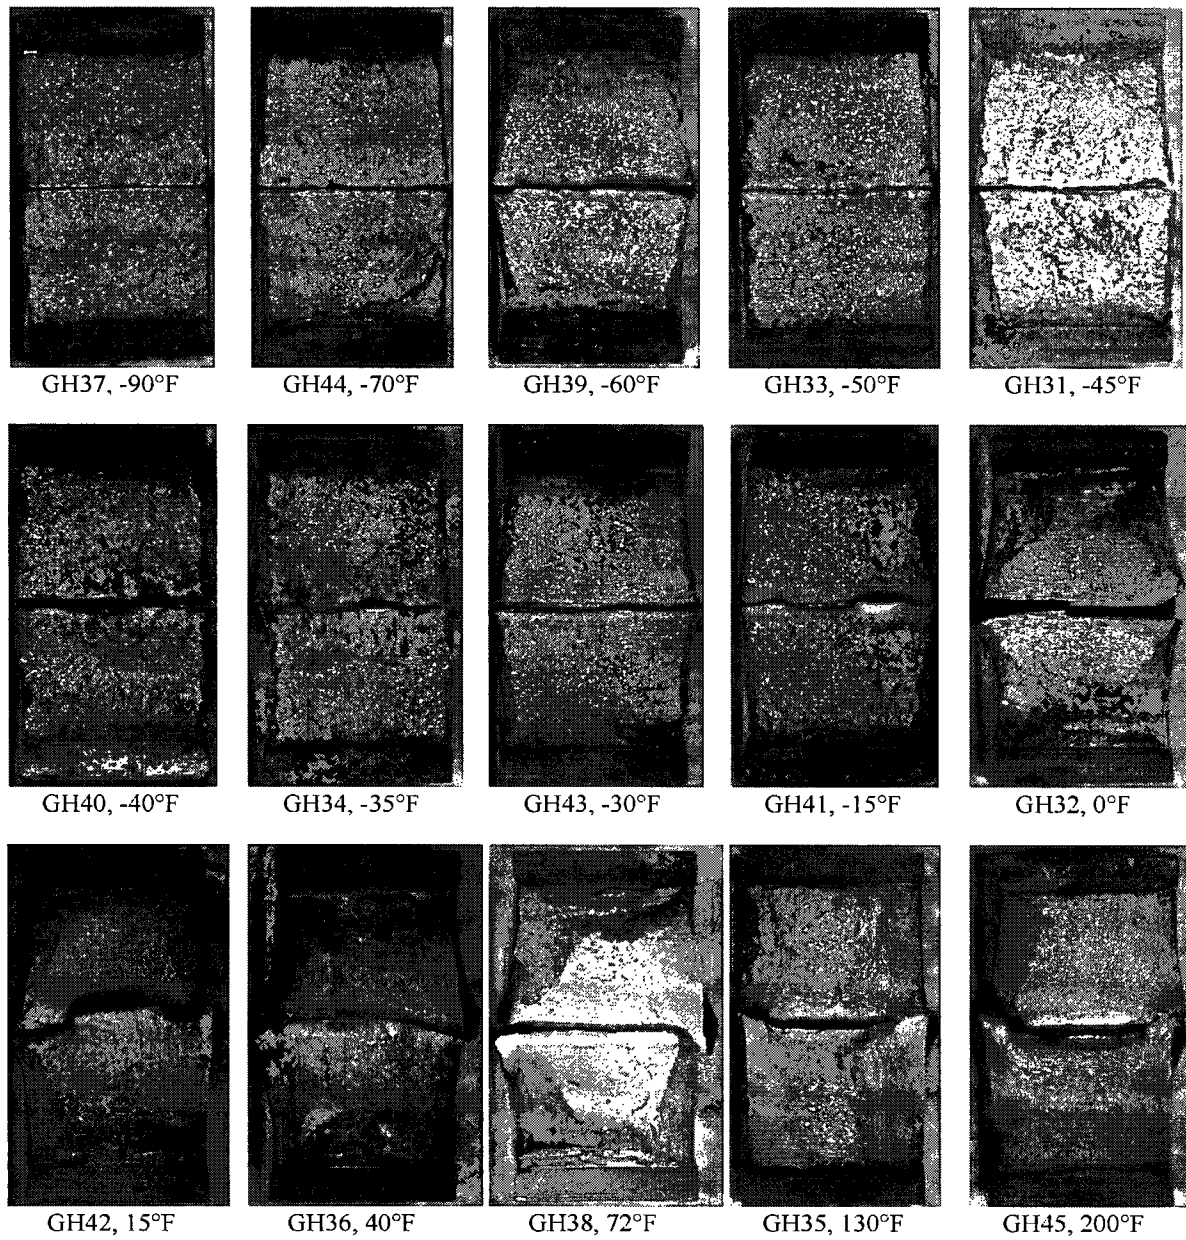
Charpy Impact Specimen Fracture Surfaces for the South Texas Unit 1 Reactor Vessel Heat-Affected Zone Material
